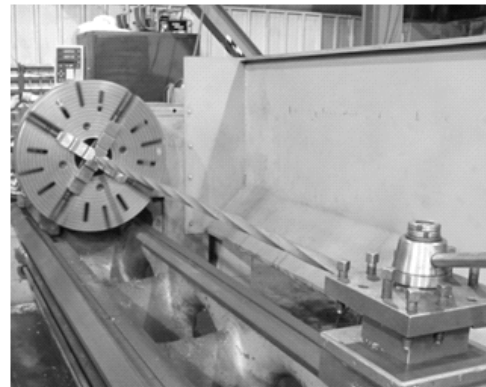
Twisting of the Ransome Bars (photo courtesy RMD Engineering Inc.)
